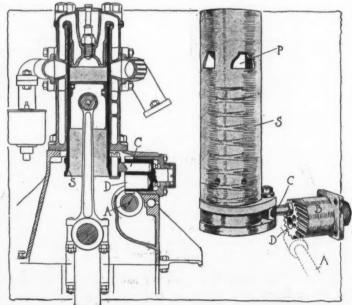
Argyll sleeve motor, showing operation of sleeve valve
